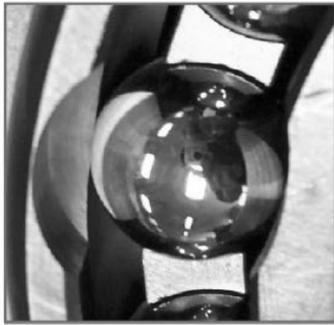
View of a single-row deep-groove filling slot-type ball bearing assembly. (Courtesy of the Timken Company.)
